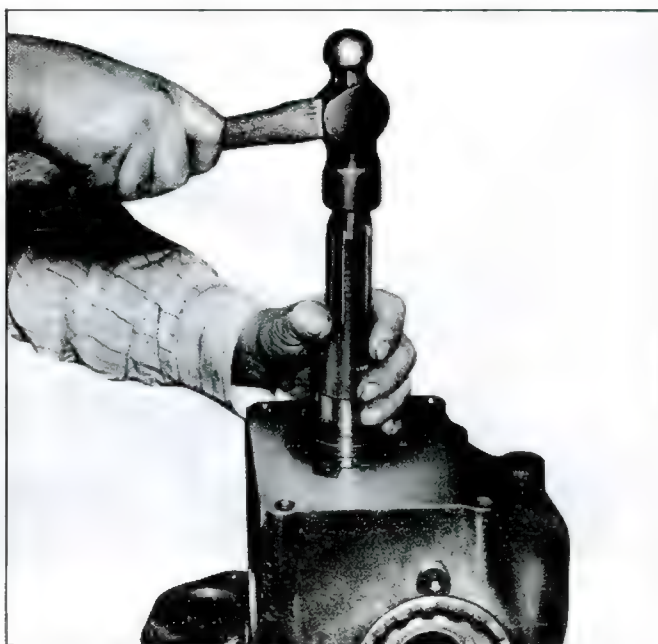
Installing Pinion Shaft Front Seal with J-8340
